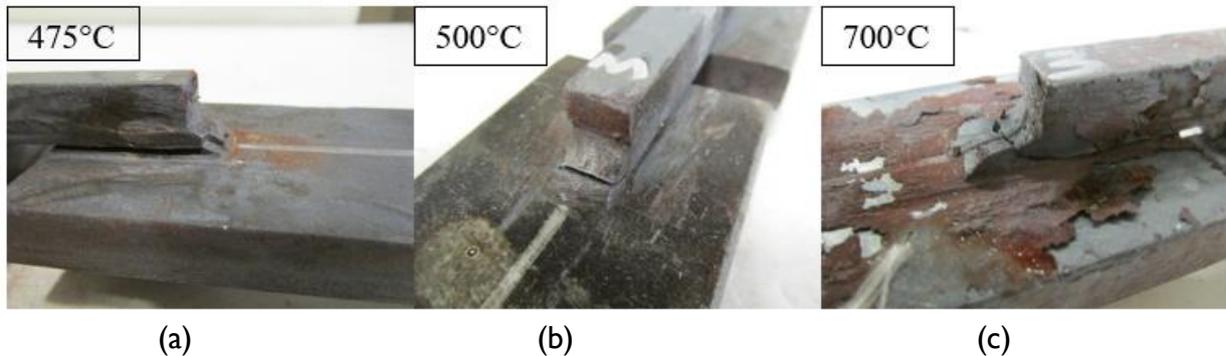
Creep fracture at the throat of the weld for transverse welded lap joints subjected to 0.90P at: (a) 475°C, (b) 500°C, (c) 700°C
